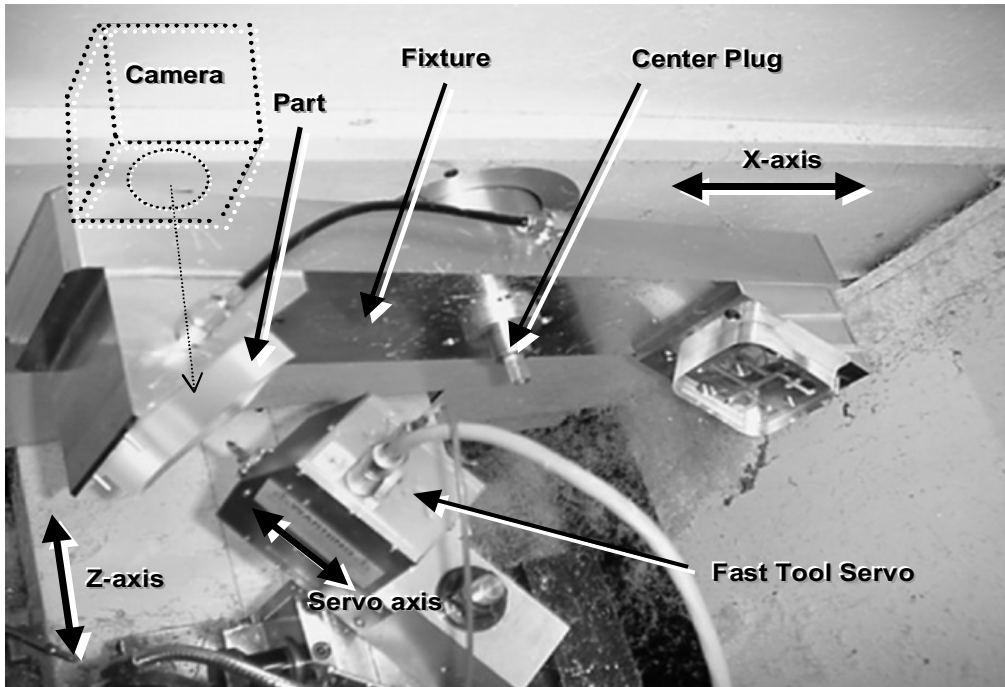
Machining setup showing acrylic test parts, camera arrangement, and centerplug.
